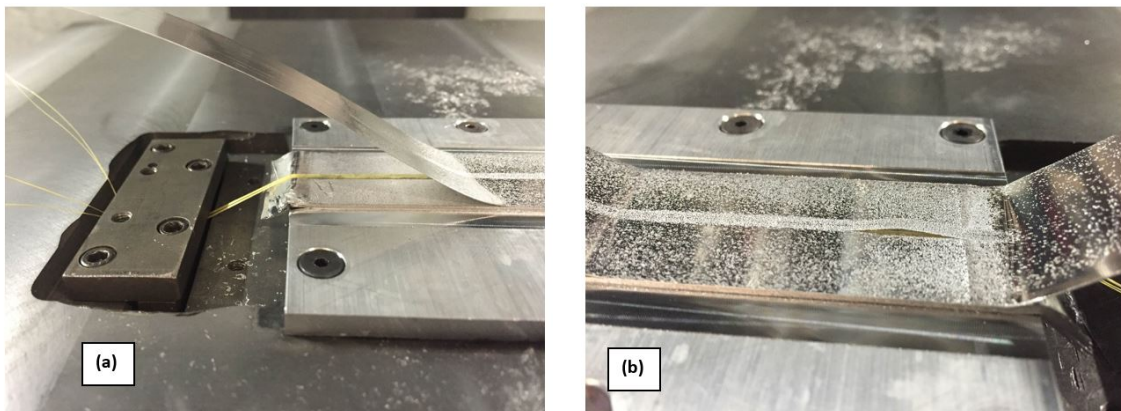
Initial attempt to embed four aramid threads without channels, (a) beginning of weld, (b) end of weld.
